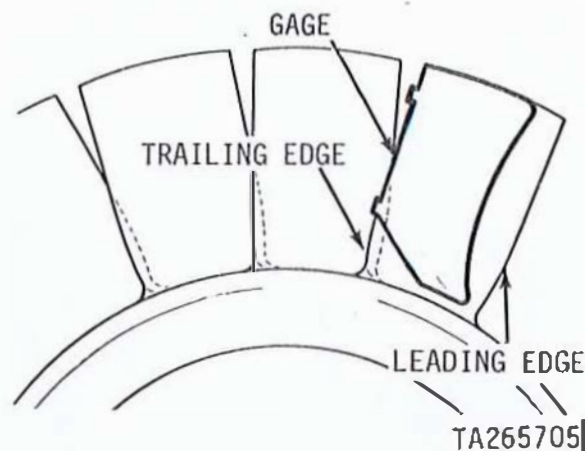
Inspecting cooling fan blades leading edge for erosion.
